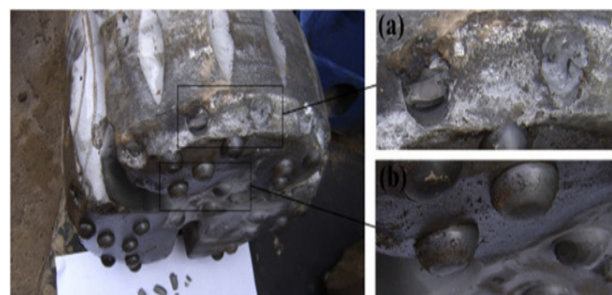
Failure of hammer bit teeth (a) fracture (b) wear [33].
